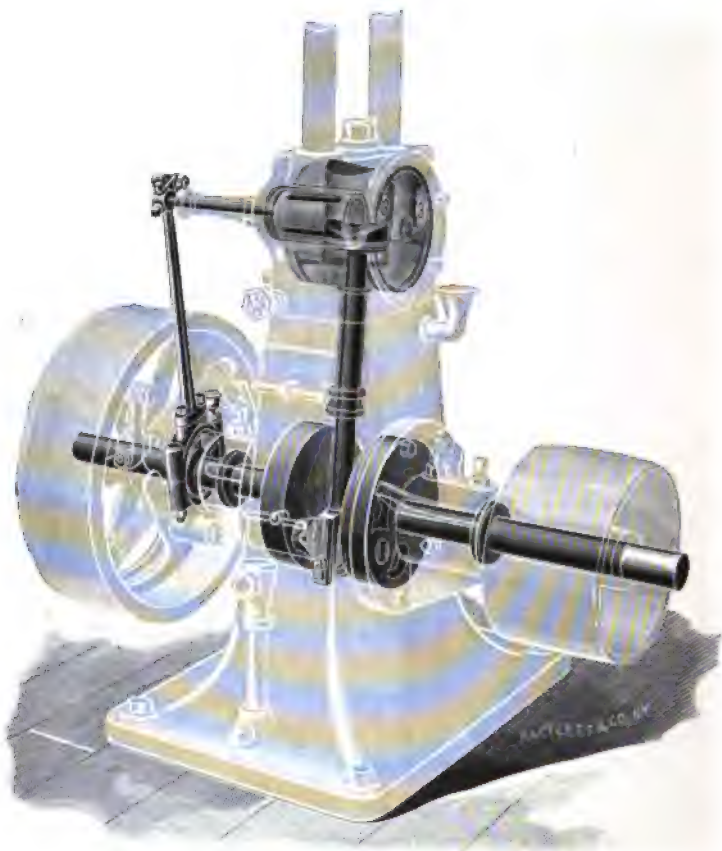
THE WORKING PARTS OF A CASE PEDESTAL ENGINE.—SEE ALSO FIG. 8
